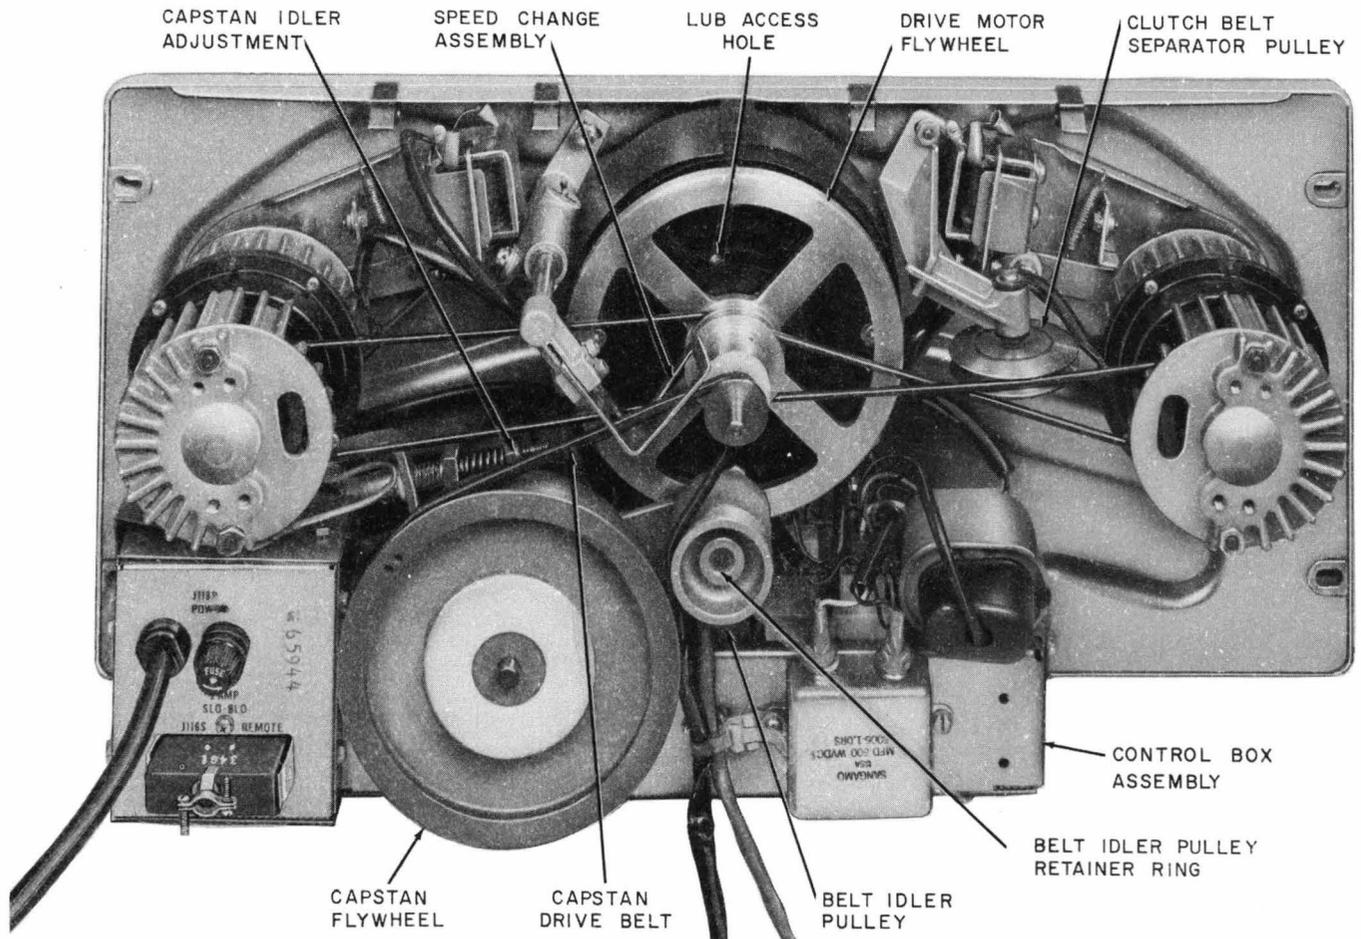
KS-19124 L2 Record-Reproduce Mechanism — Rear View — Screen and Fan Removed
